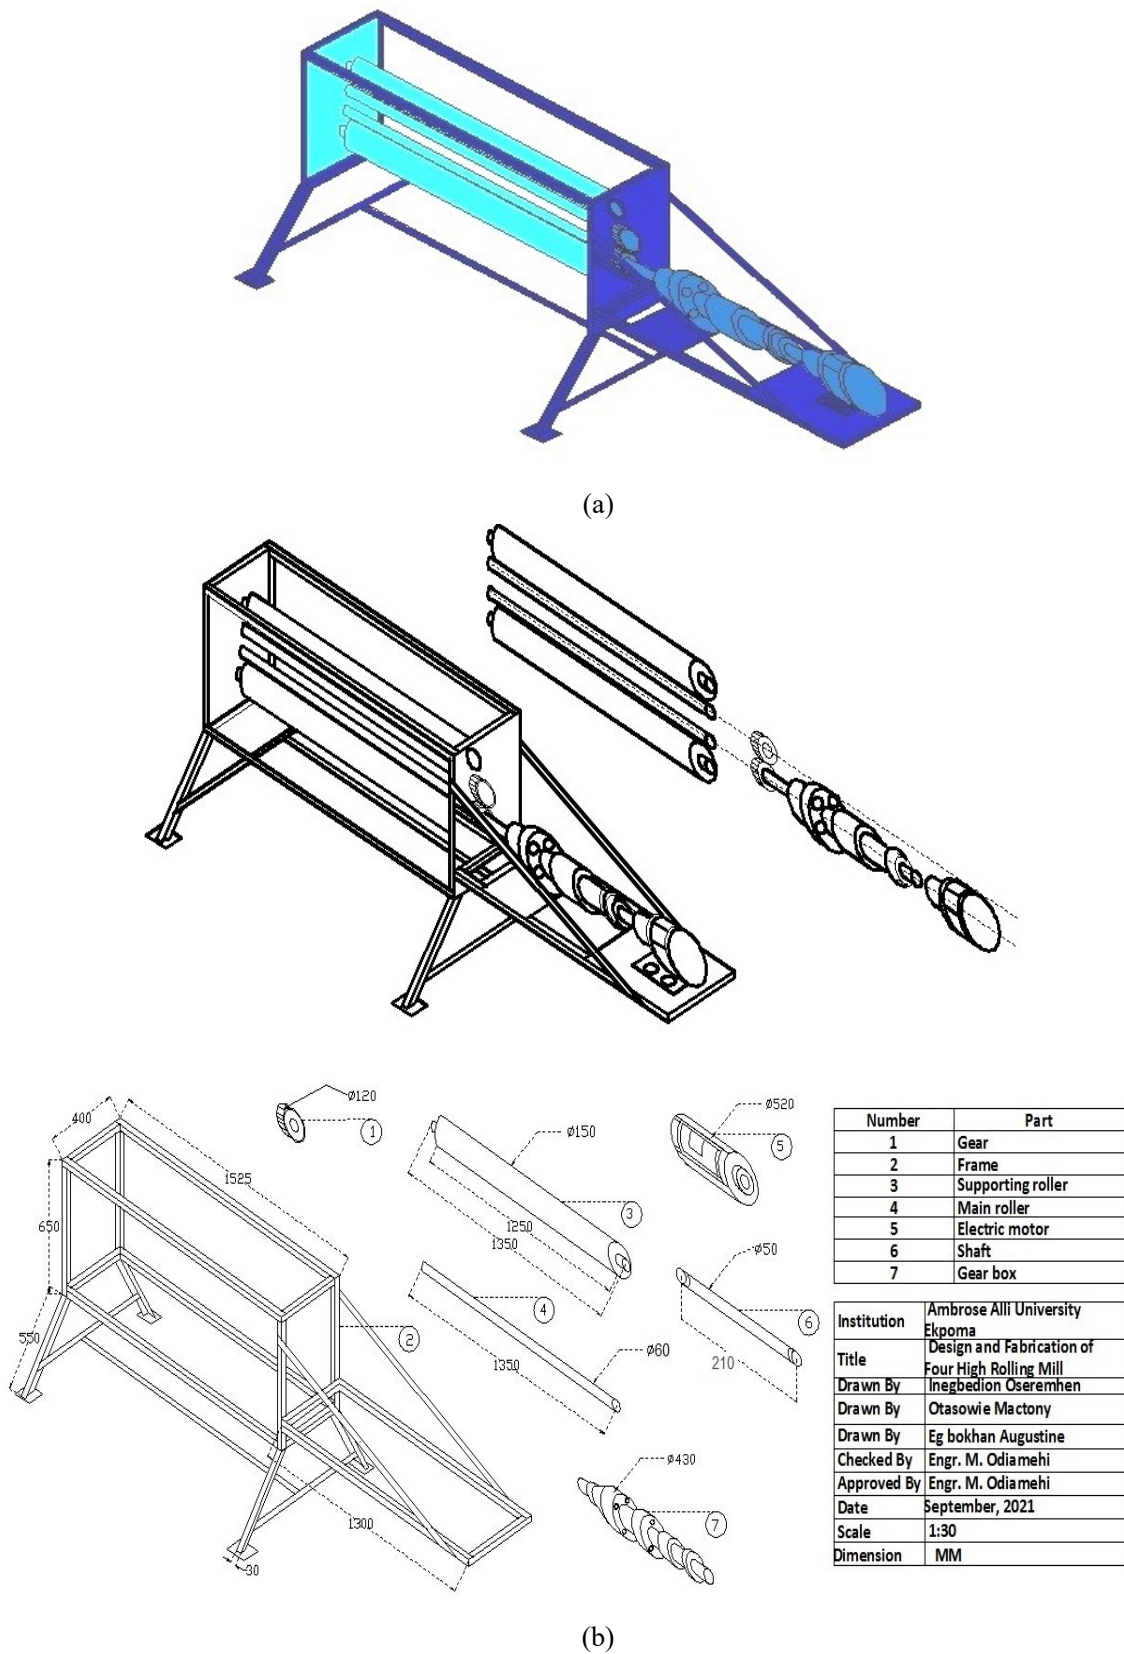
Components of the Rolling Mill (a) Isometric Modelling and (b) Exploded View of the Machine.
